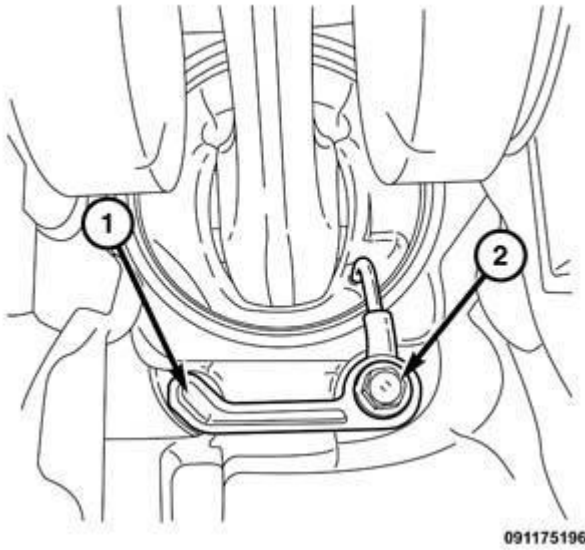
Removing/Installing Oil Jet Piston Cooling Nozzles
